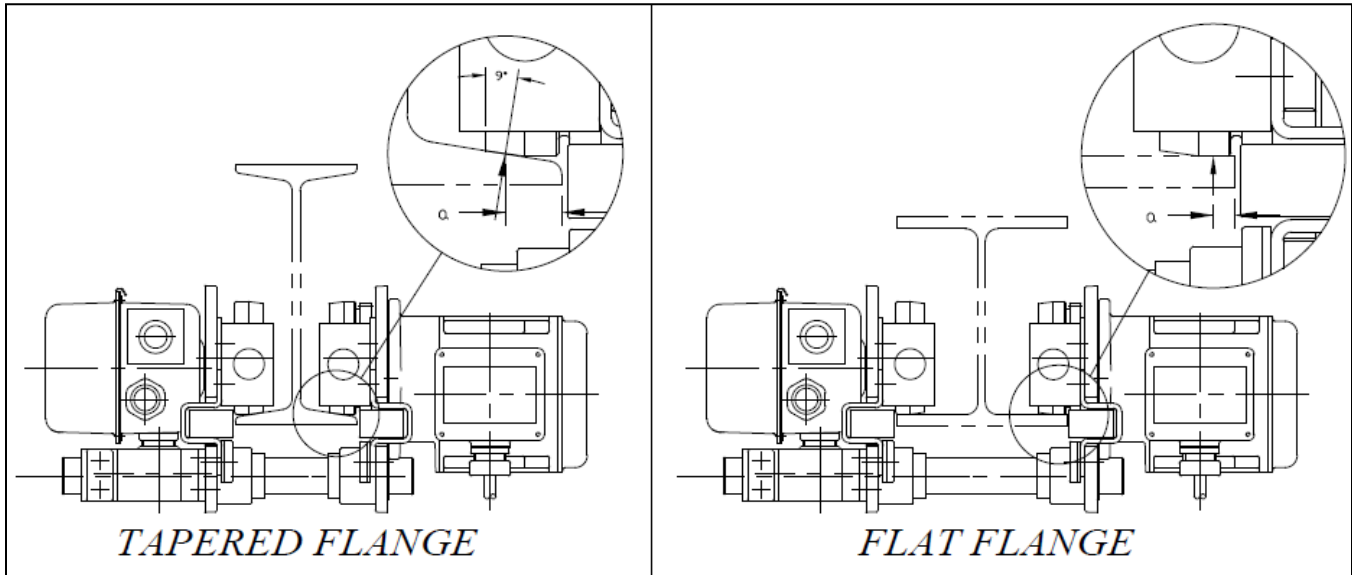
Examples of Nominal "a" Dimension location for tapered and flat flanges.
